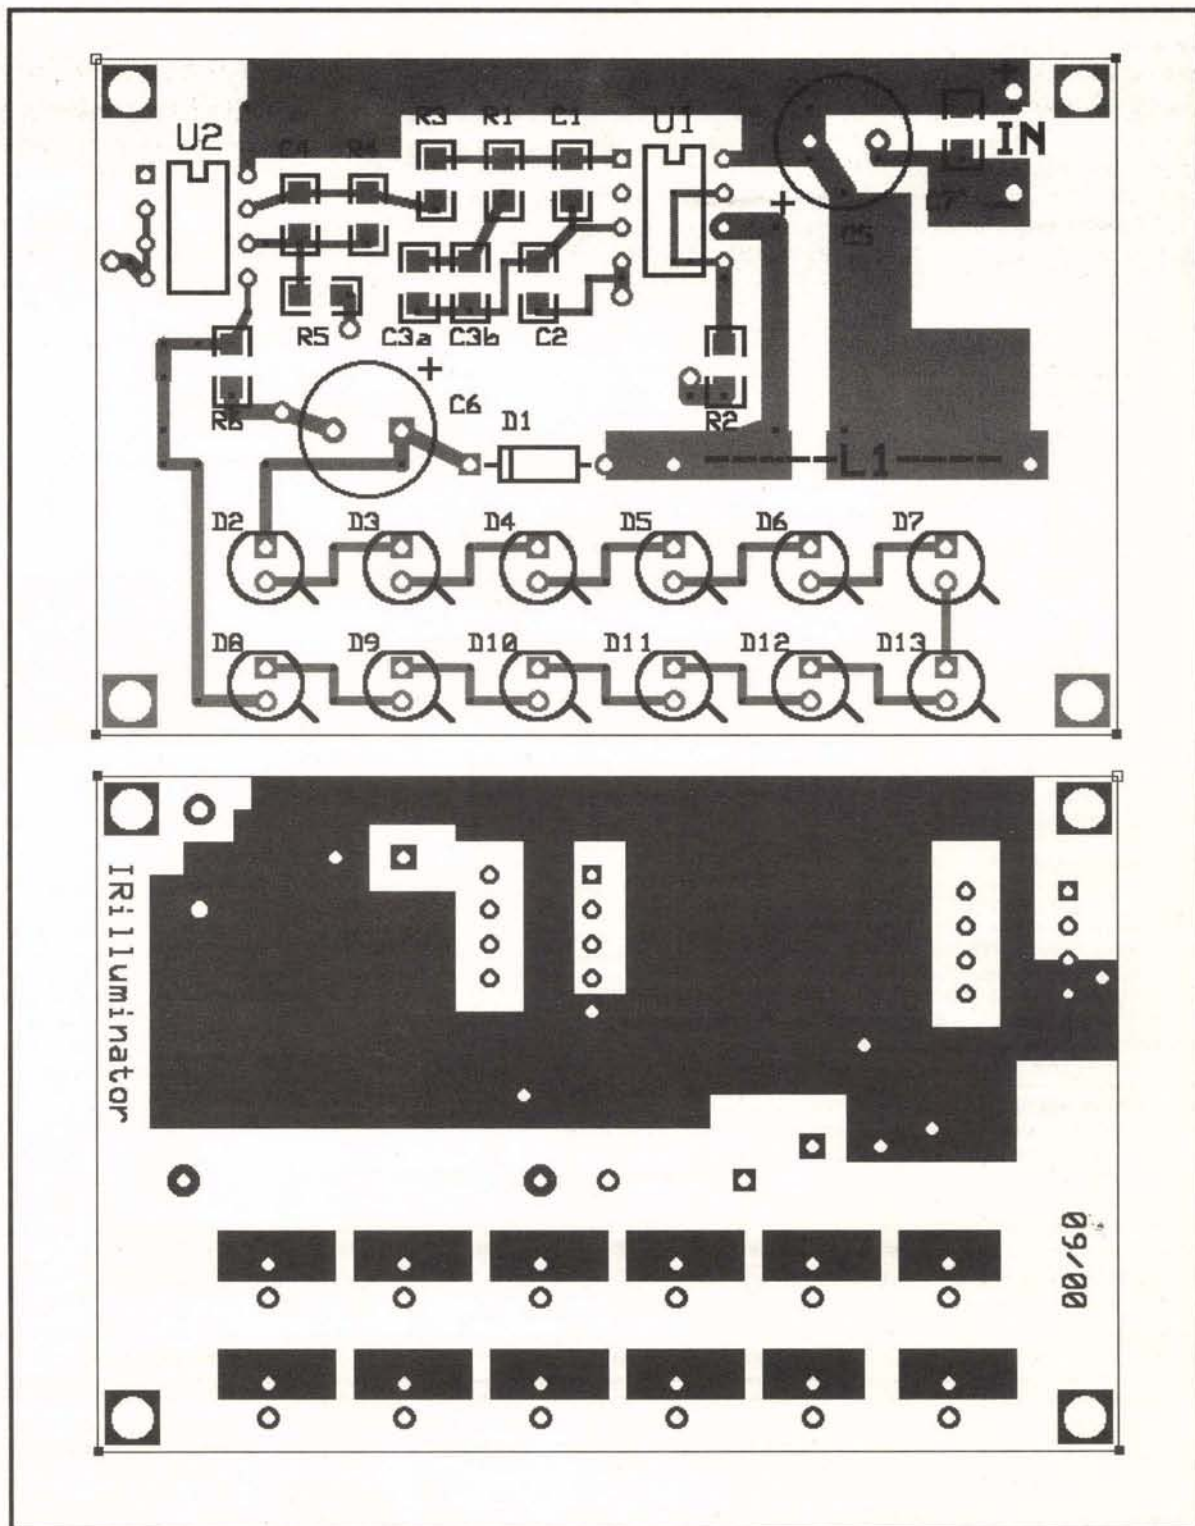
Double-sided board layout. Component side (top), and solder side (bottom). The IR LEDs are placed on the solder side, see Photo 4.
